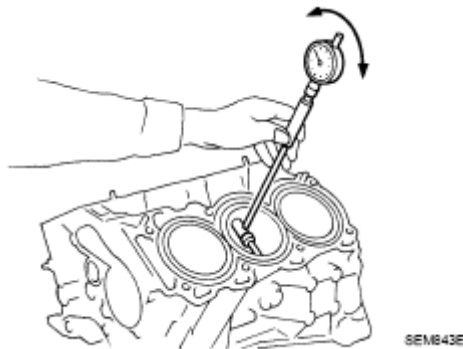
Checking Clearance Of Piston-To-Cylinder Bore
